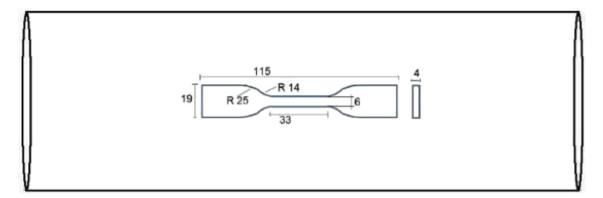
Tensile test specimen machined from a pressure sheath of a flexible pipe.
